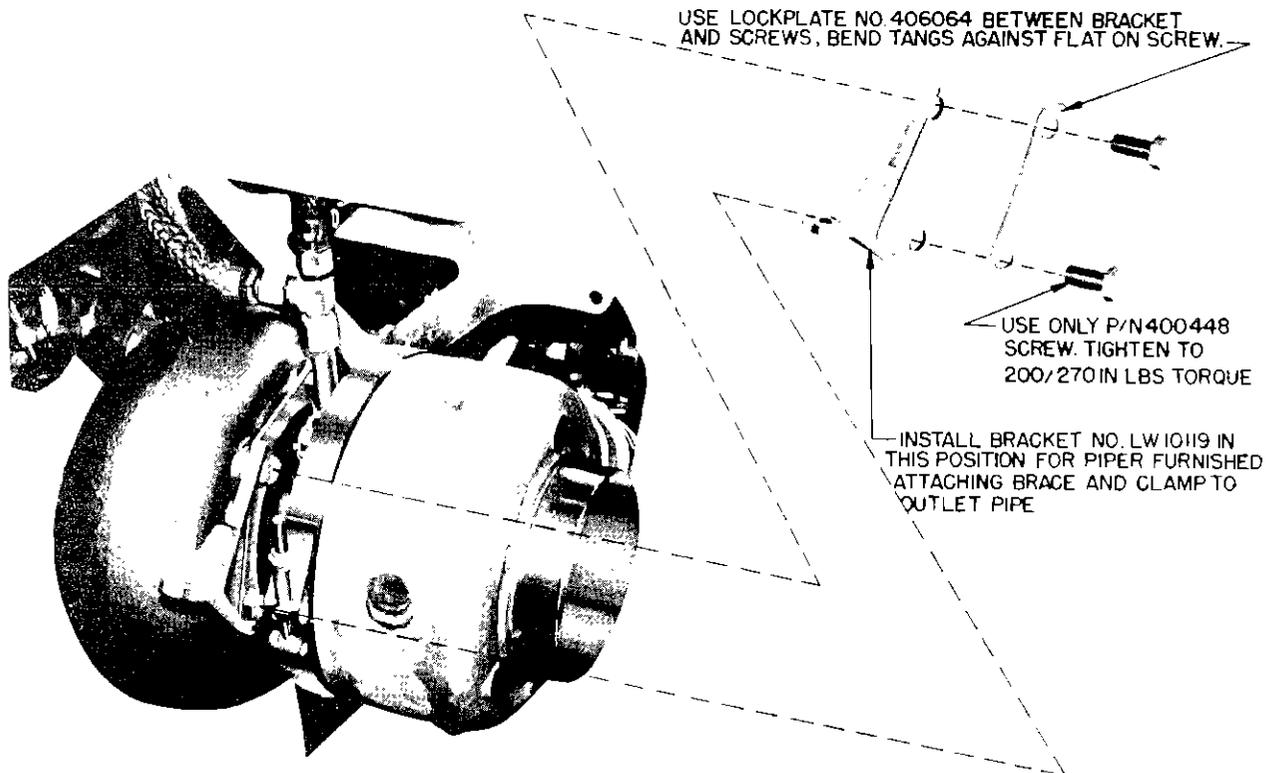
Rear View of Turbocharger Showing Details for Bracket Installation
